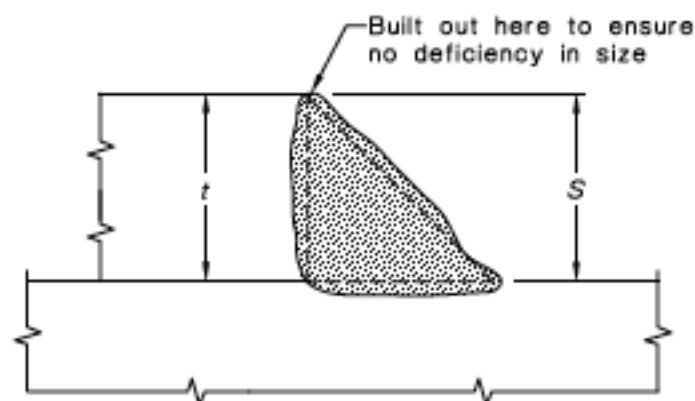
DEEP PENETRATION FILLET WELD
